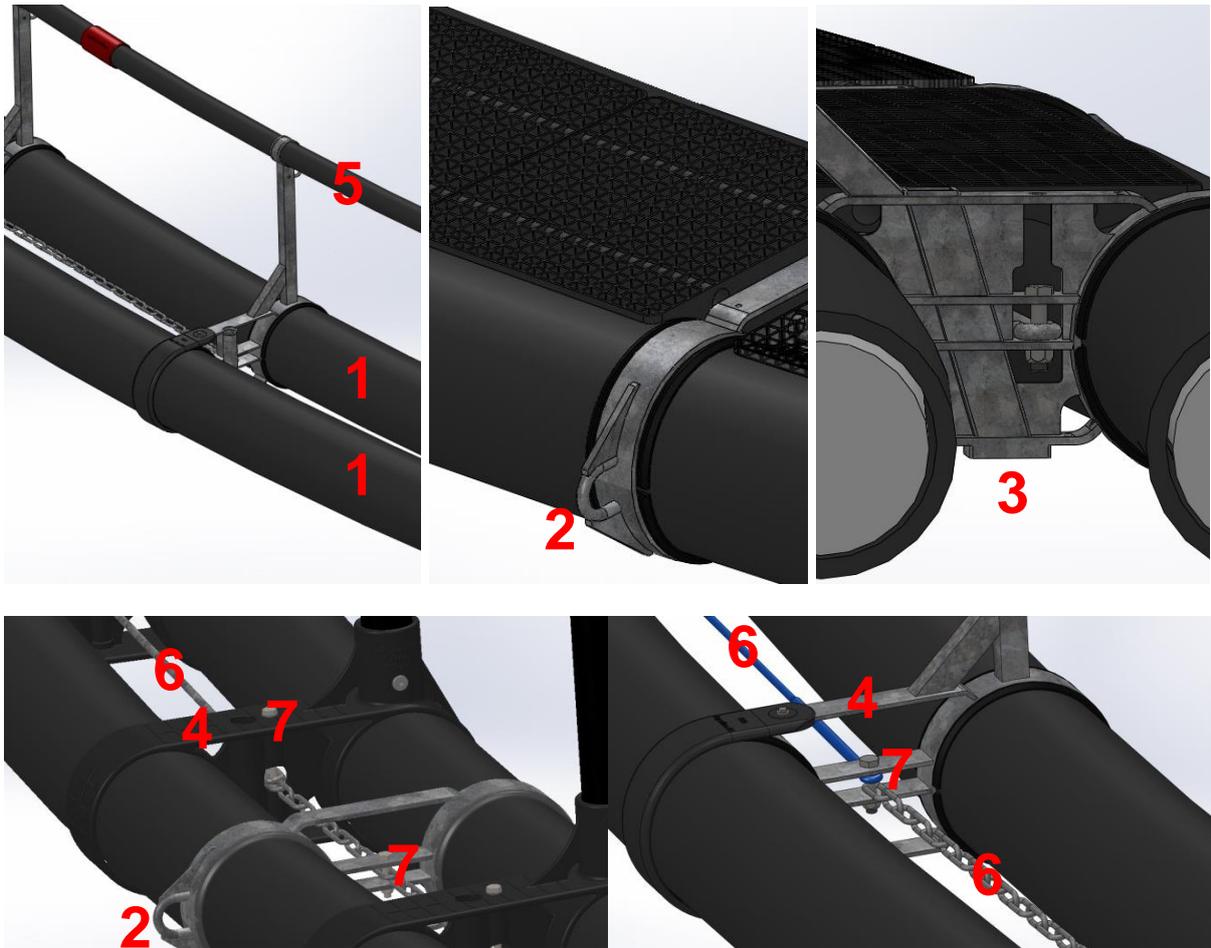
The illustrations show checkpoints for inspection and maintenance.
